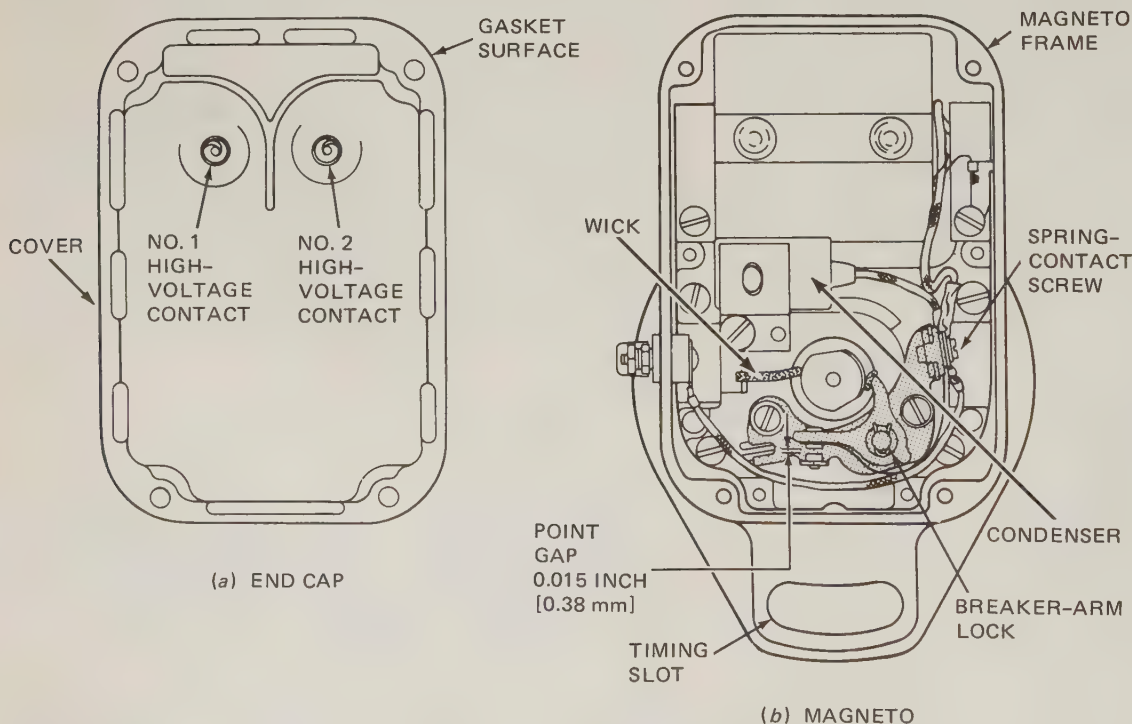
The magneto for a two-cylinder four-cycle engine, with end cap removed. (Kohler Company)
